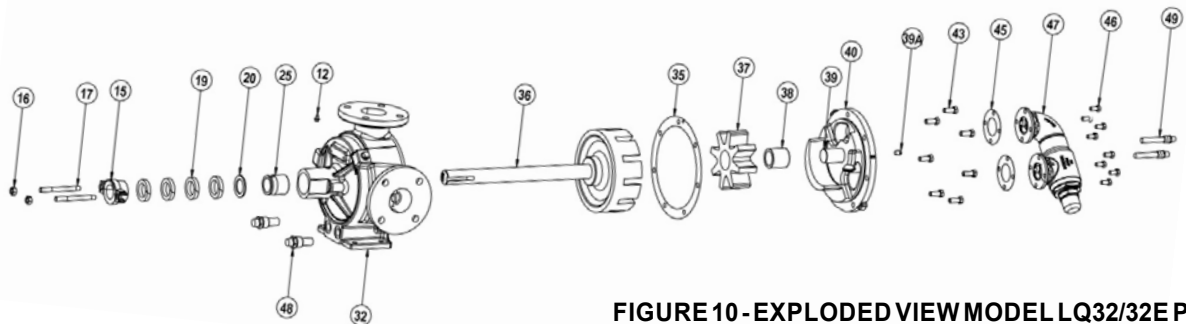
EXPLODED VIEW MODEL LQ32/32E PUMP
